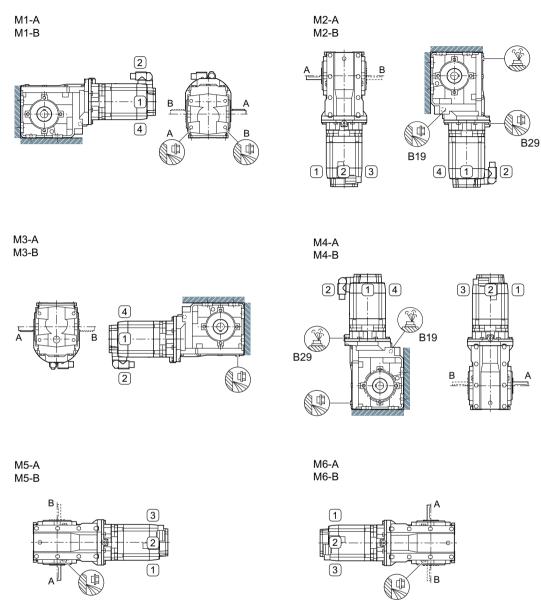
Mounting positions for servo bevel geared motor B, foot-mounted design, frame sizes 19 - 29, 2 stage
